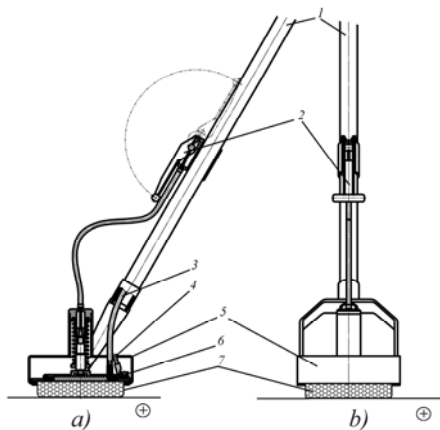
General view of external electrode (its operating part): side view (a) and front view (b)
